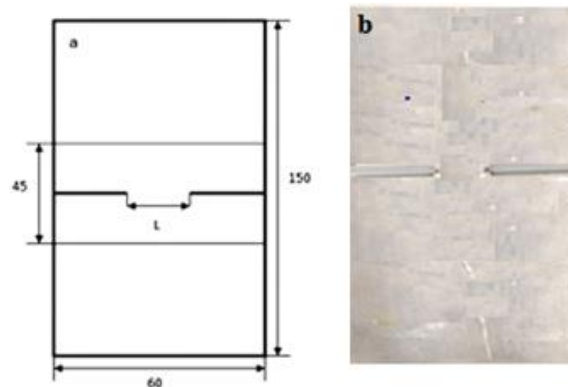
(a) Geometry and dimensions of the not welded DENT specimen (dimensions are in mm). (b) Cutting by water jet of not welded specimen on plate of aluminum
